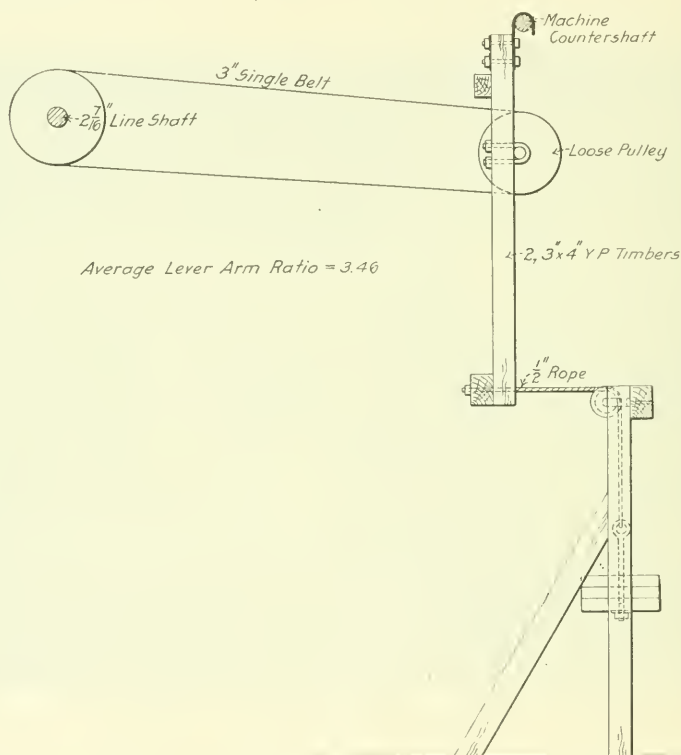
ARRANGEMENT OF COUNTERSHAFT FRAMES USED DURING COMPARATIVE TESTS OF BALL AND RING-OILING BEARINGS
